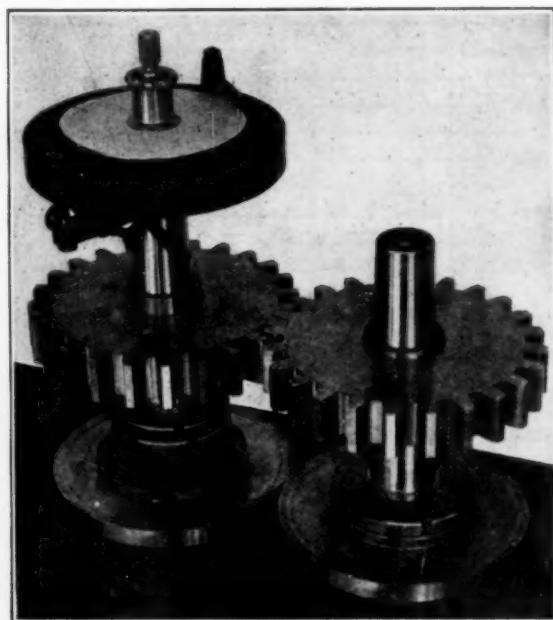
SAURER GEAR-TESTING MACHINE, SHOWING CHART BEING TRACED
